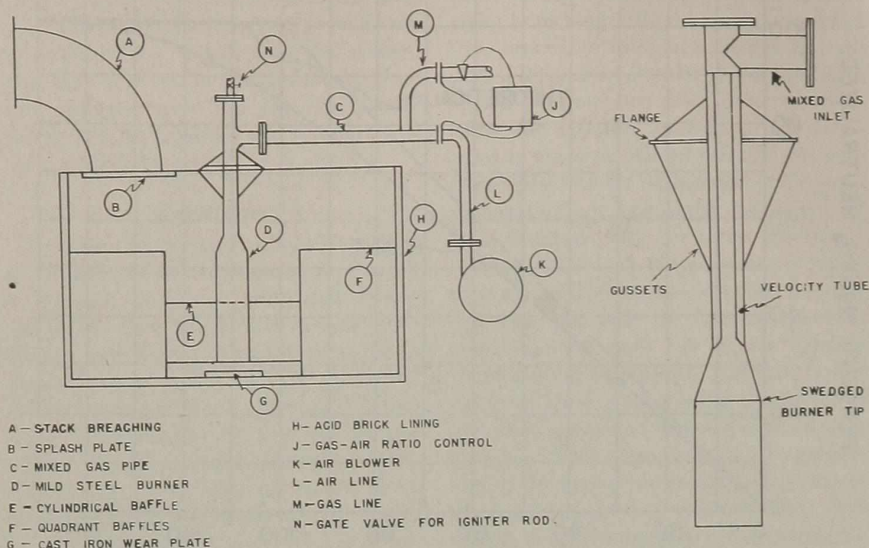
SECTIONAL VIEW OF SUBMERGED COMBUSTION EVAPORATOR AND BURNER
